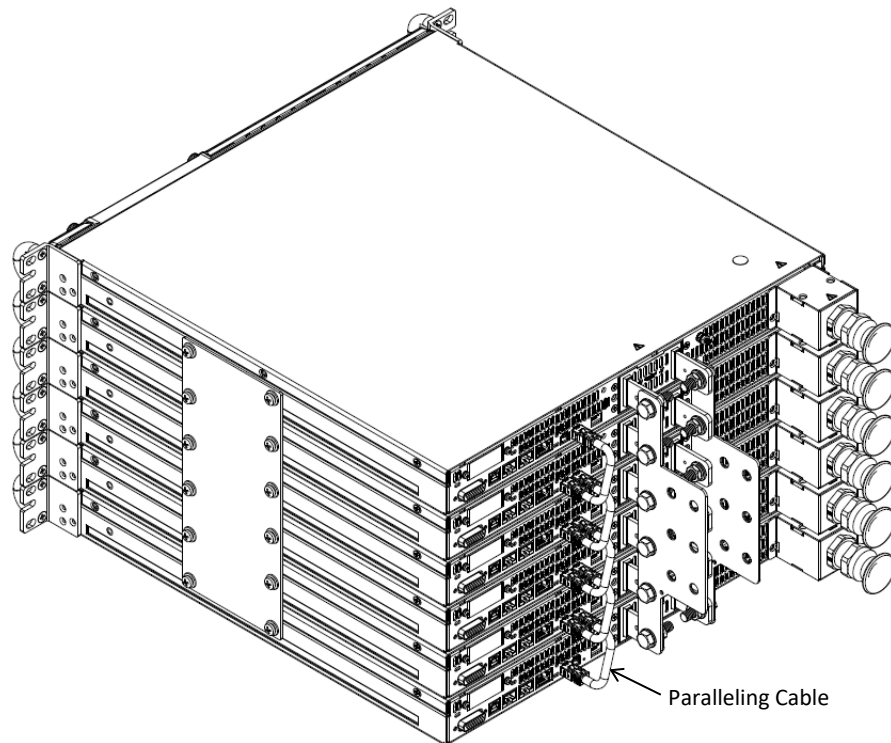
Six 60V÷100V Units Paralleling Cable Connection
